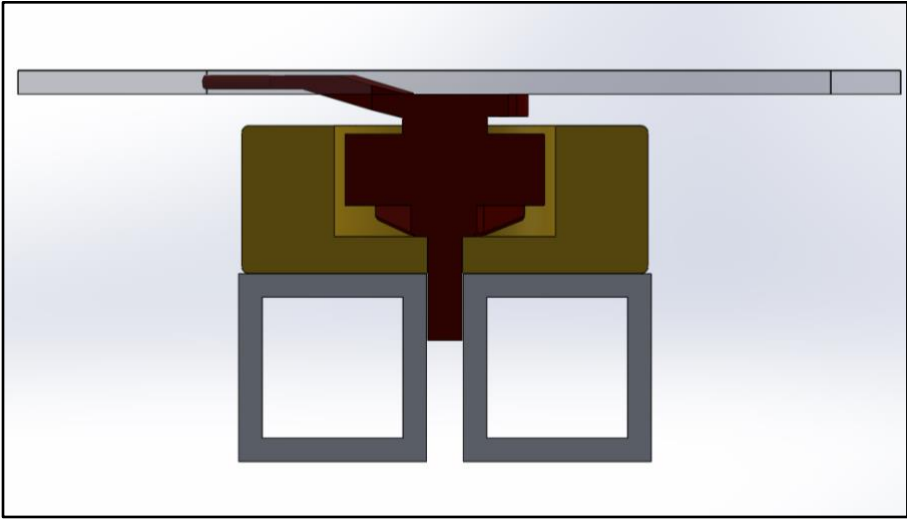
CROSS SECTION DEPICTING THE COMPLETE ASSEMBLY
